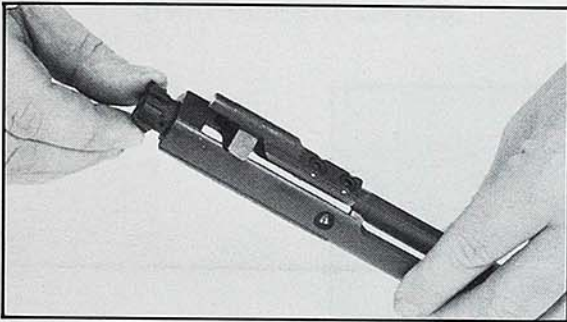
BOLT CARRIER DISASSEMBLY
